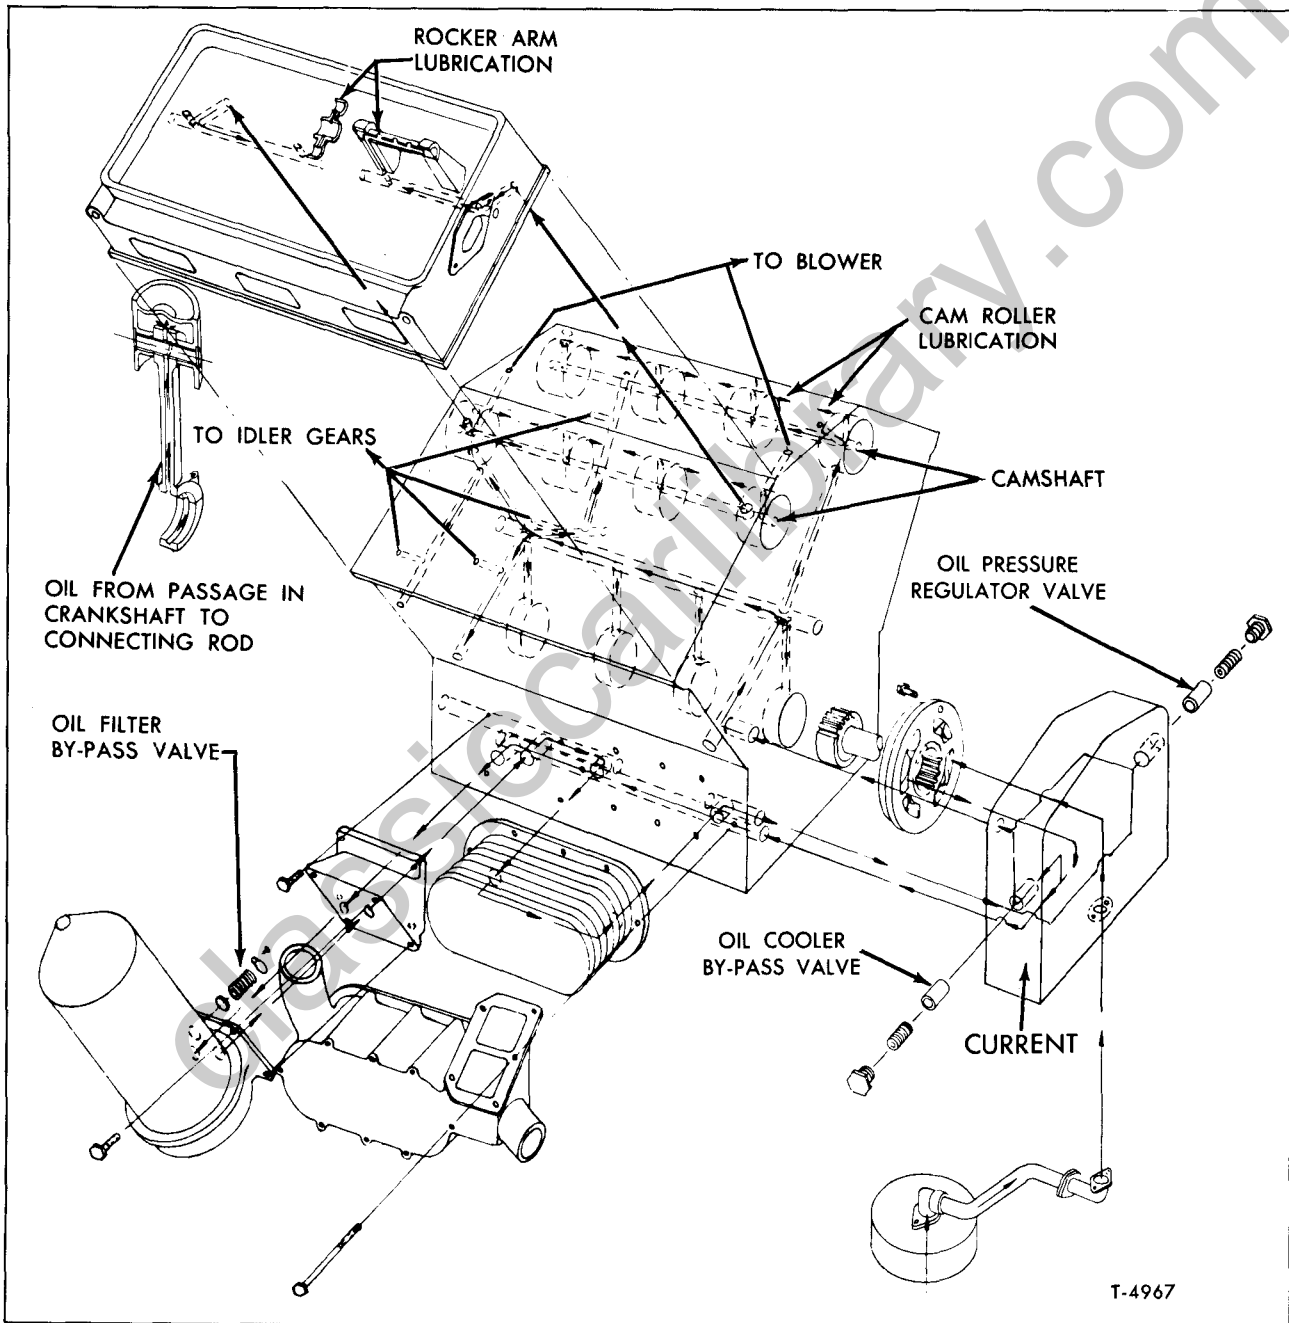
Schematic Diagram of 6V-53 Engine Lubrication System
